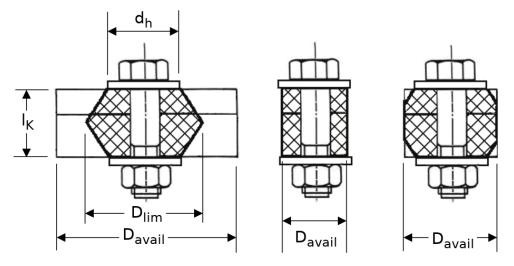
Compression zones in cylindrical clamped parts [2]
